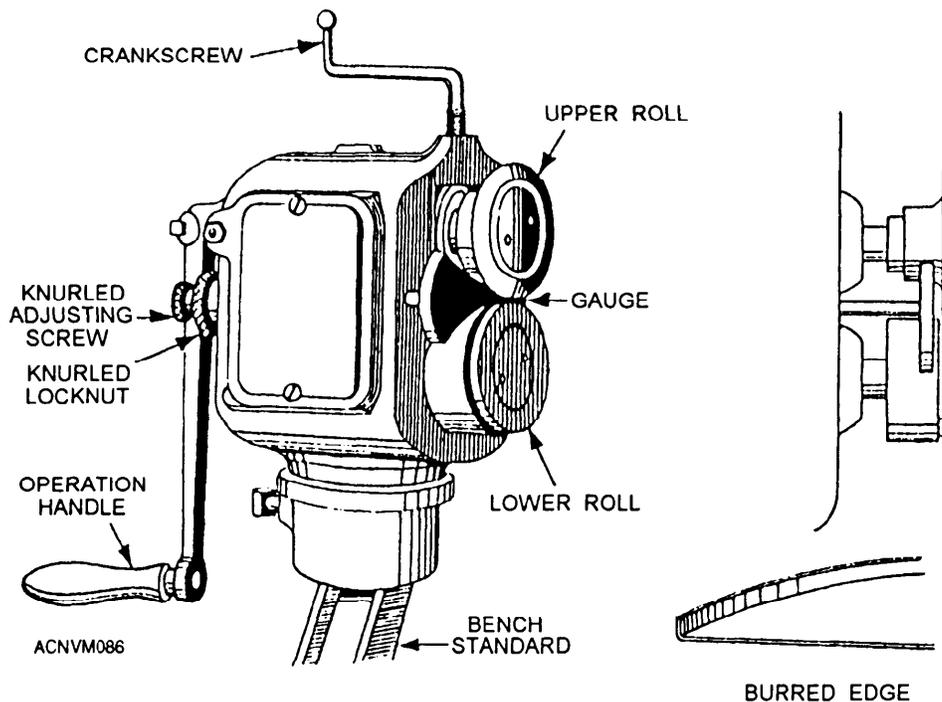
Combination rotary machine (shown with burring rolls).
